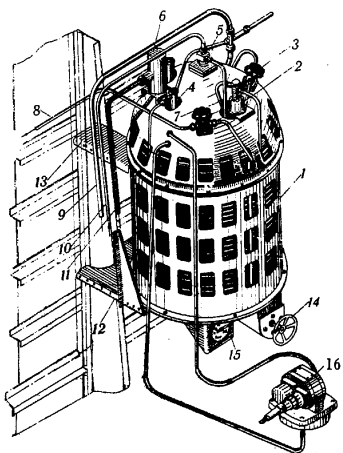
K1A-30 Converter and Oxygen Level Indicator Installation at Frame No. 22
